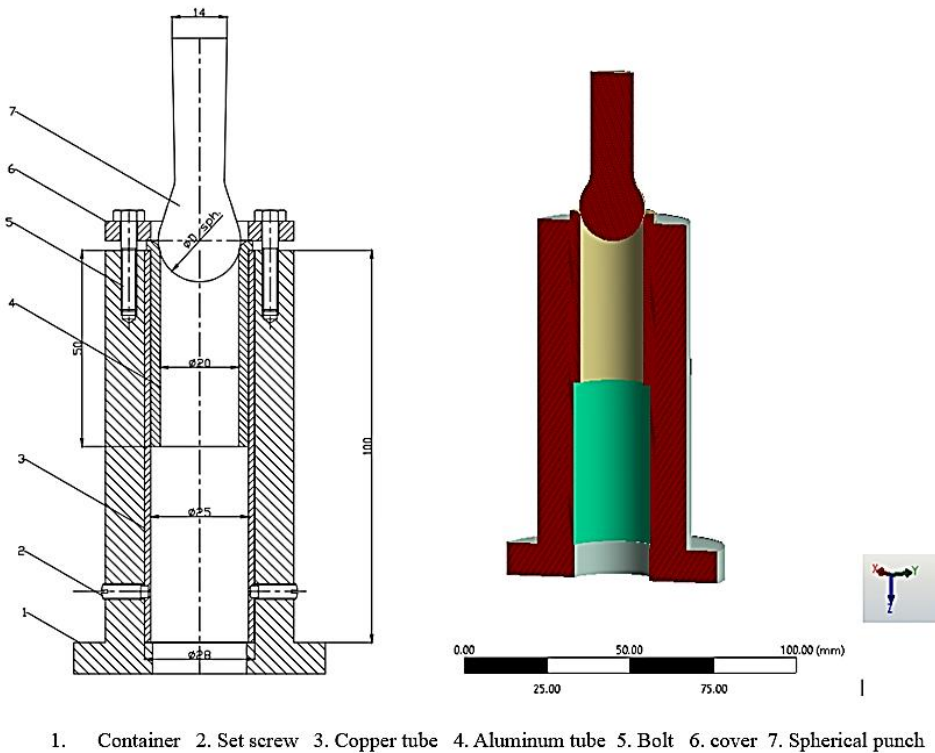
Setup assembly drawing for the process, (punch have three different diameters  $D = 21$  mm, 21.6mm and 22mm).
